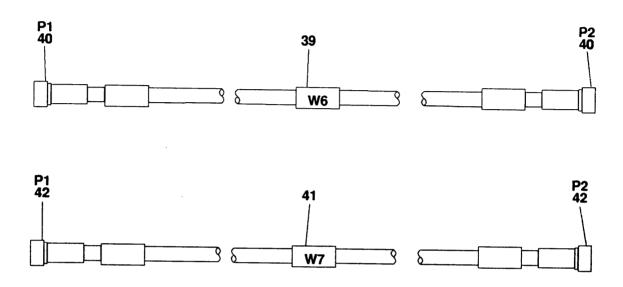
UH60A/L System Installation Cable Group (Sheet 3 of 3)
